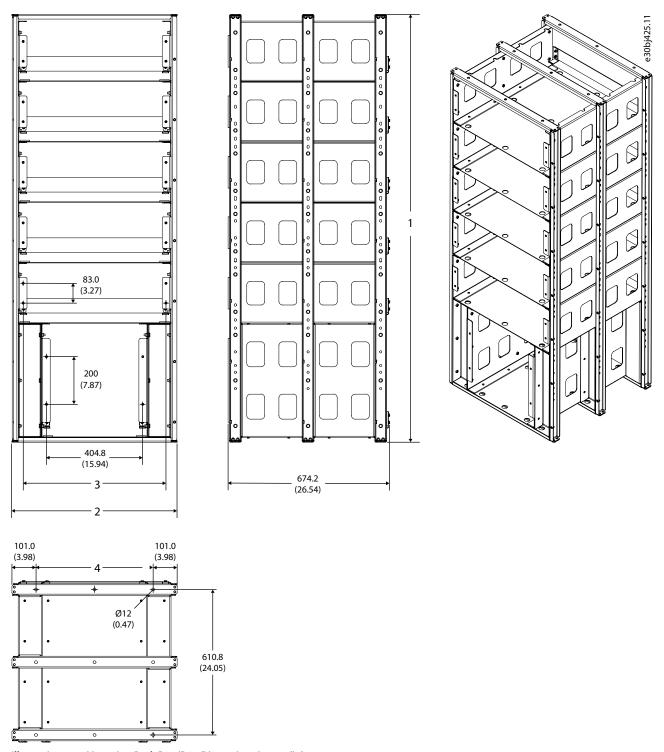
Mounting Rack D20/D30 Dimensions in mm (in)
